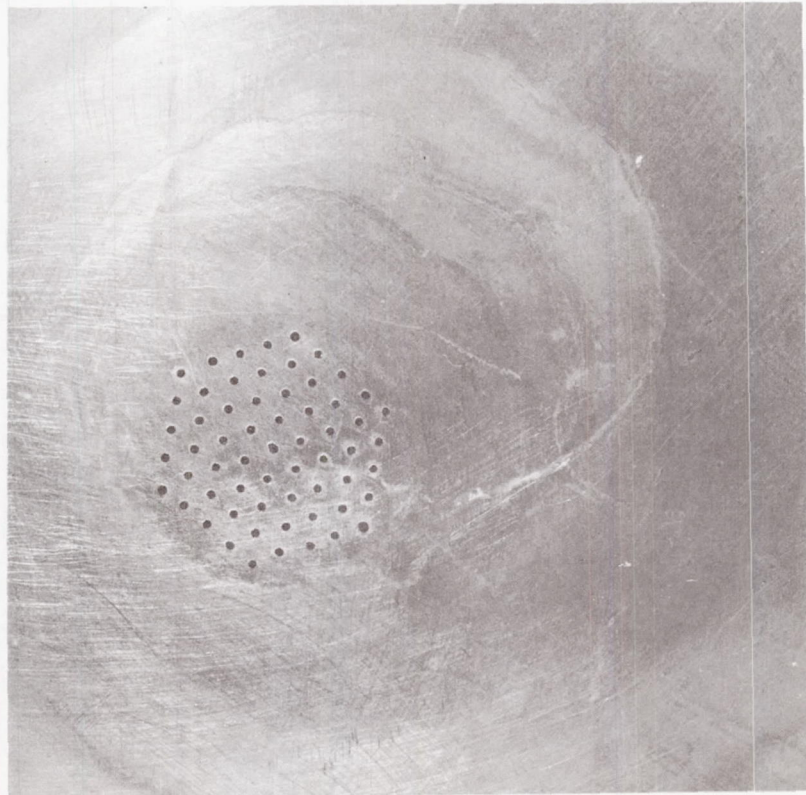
Module Oxidizer Tank Gas Inlet Fitting
